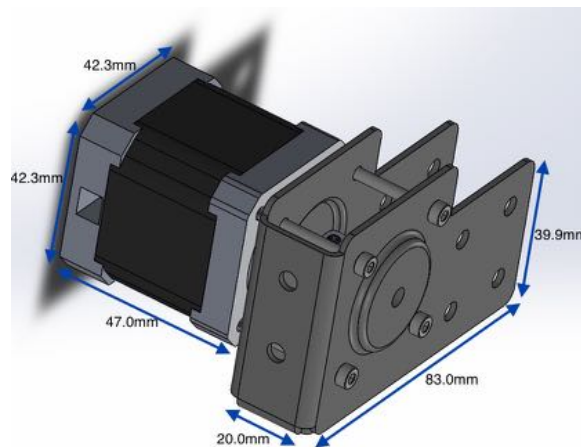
A CAD model of the assembly of the OpenBuilds endmount and the NEMA 17 stepper motor
